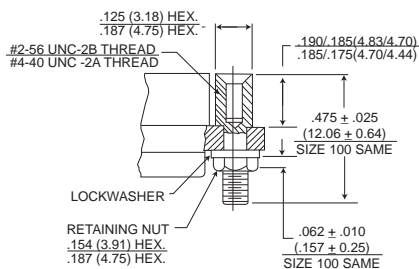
Jackpost Assembly Size 9-51 Size 100\
